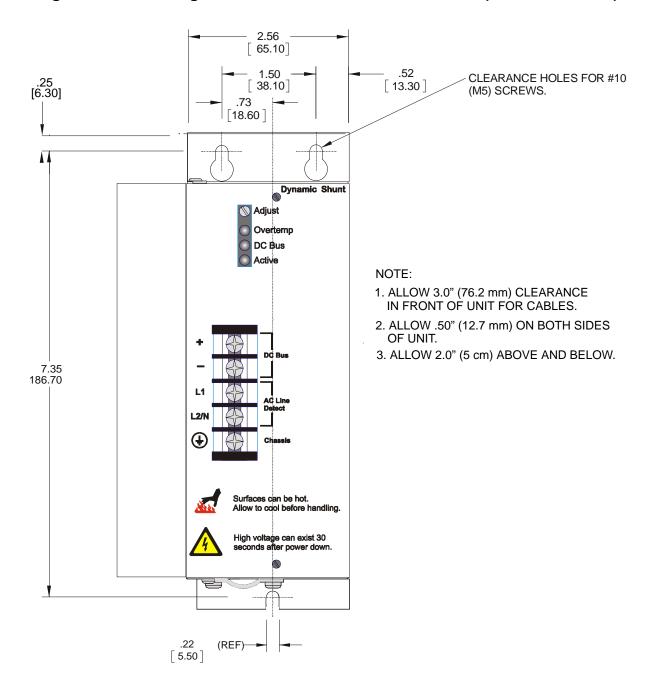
Mounting Dimensions for 230V External Shunt (P/N M.1015.7046)
